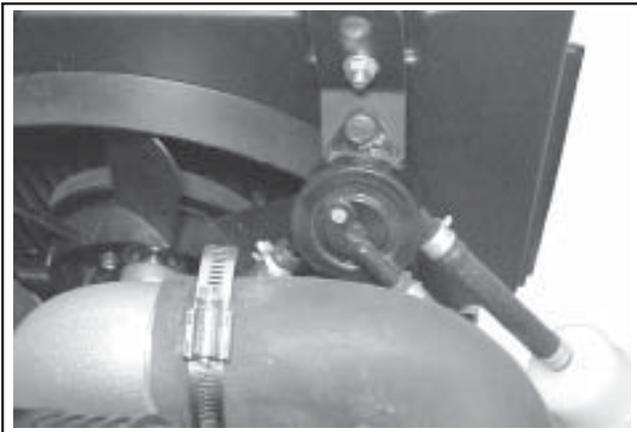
Fuel Line and Pump "Pulse" Fuel Pump.
